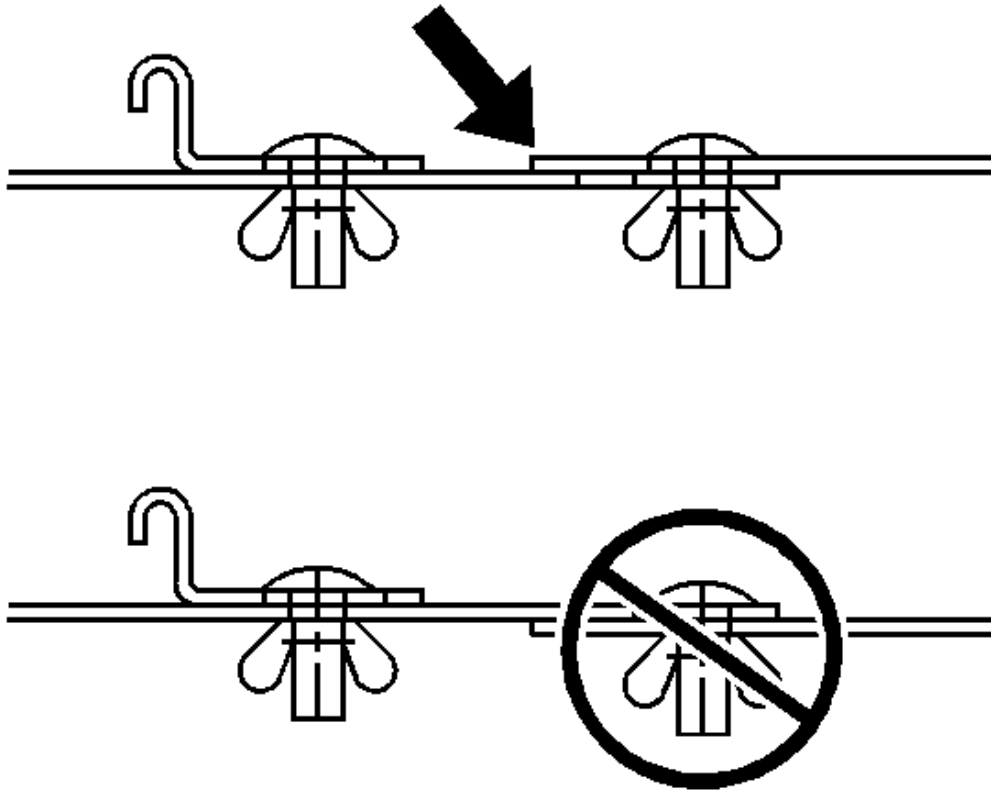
Ensuring Proper Assembly Of J 45057-2
